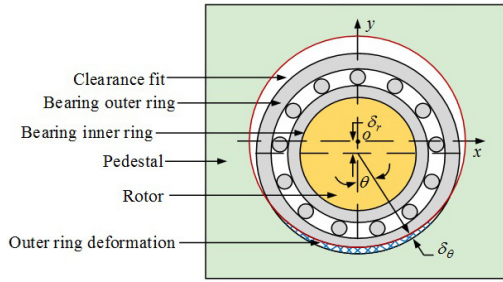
Clearance fit model of bearing outer ring and pedestal.
